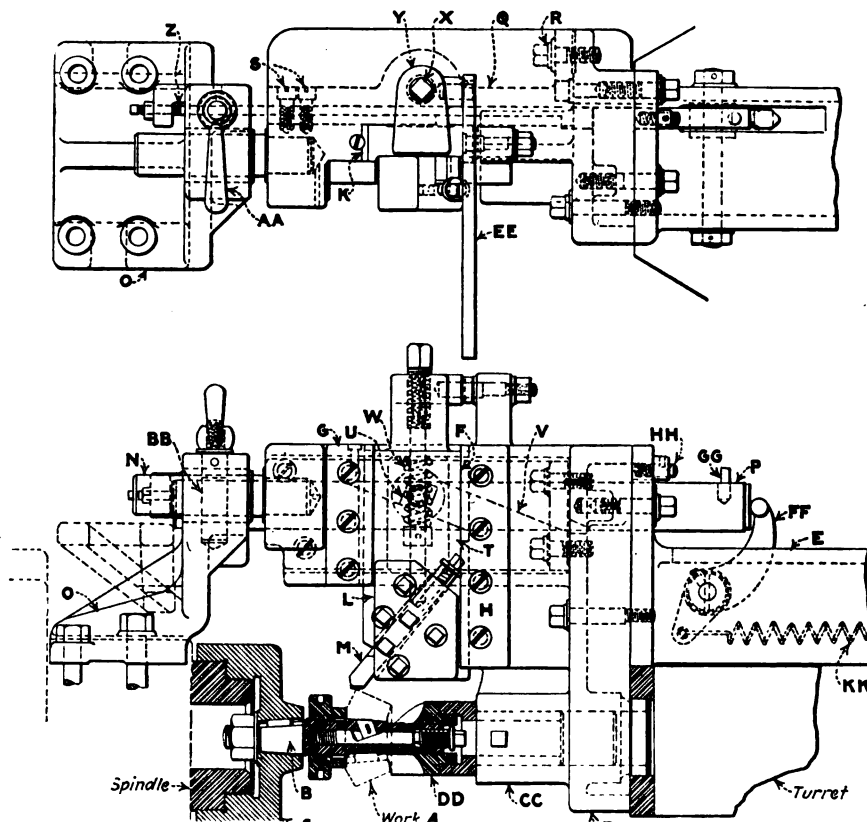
SPECIAL TAPER-TURNING ATTACHMENT FOR TURRET LATHE
